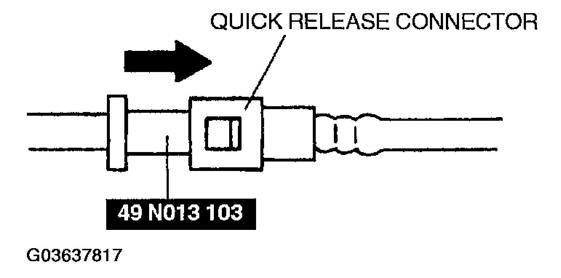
Identifying Quick Release Connector Courtesy of MAZDA MOTORS CORP.
